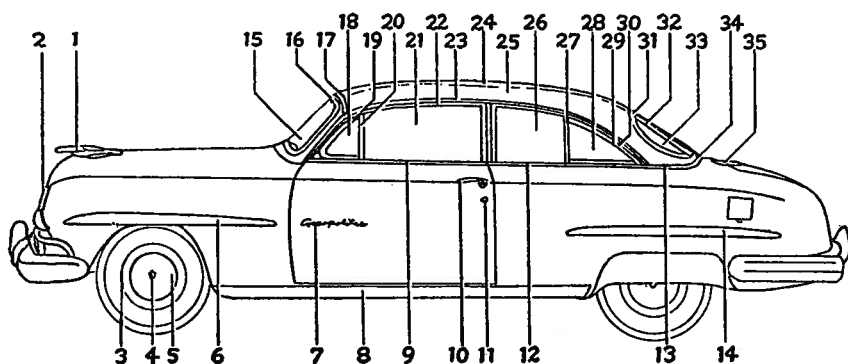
Moldings, Wheels &amp; Glass—2 Door
